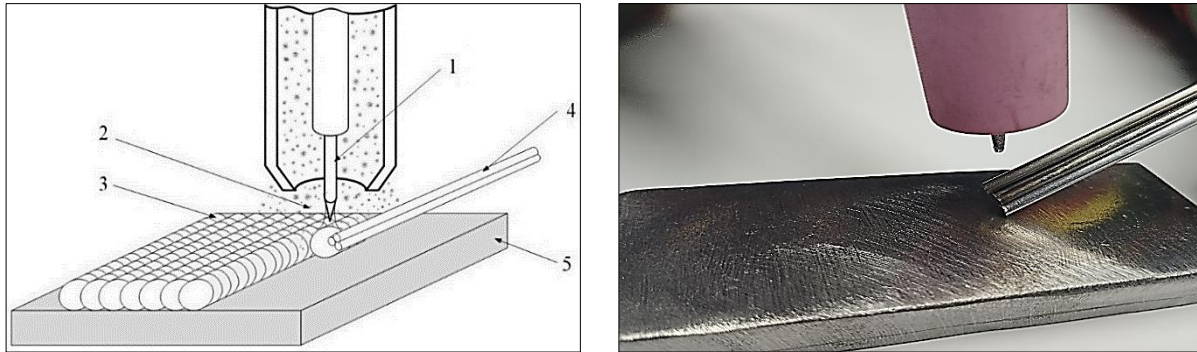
Obtaining multi-element alloys by TIG welding deposition process
